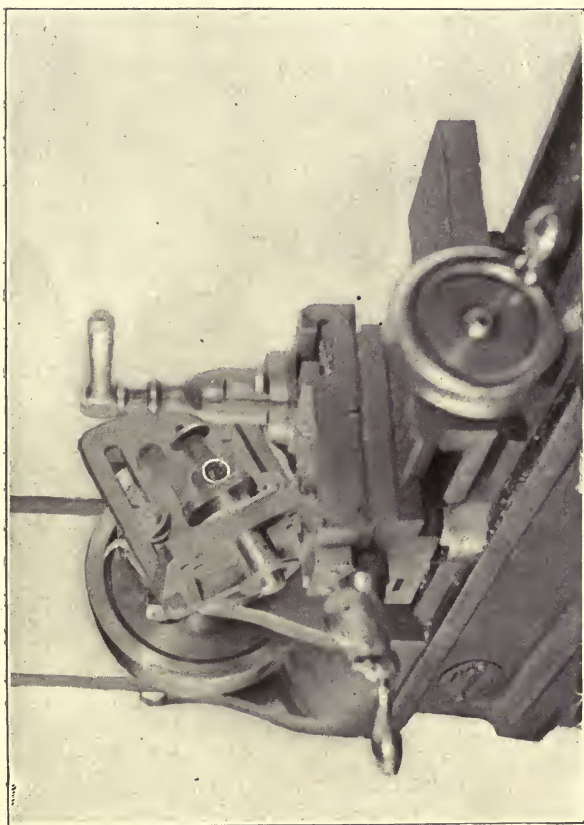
FIG. III.—BORING EXHAUST VALVE CASING FOR EXHAUST PIPE.
